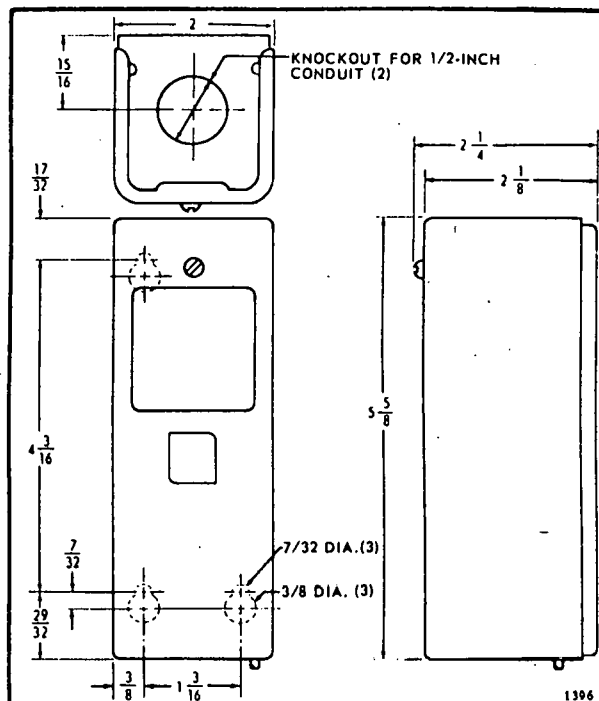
DIMENSIONS (IN INCHES) OF T675 AND T678 CONTROLLERS.
